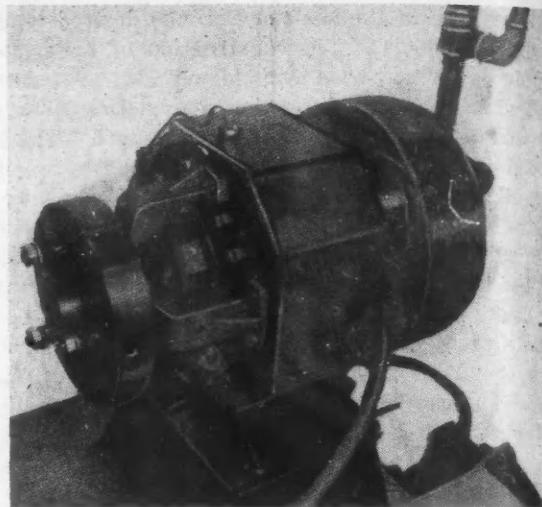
This photo shows the engine of Fig. 11 as seen from the other side. It gives a better view of the wobble-plate mechanism between the flywheel and the engine block. Note the compact construction obtained with the mechanism.
